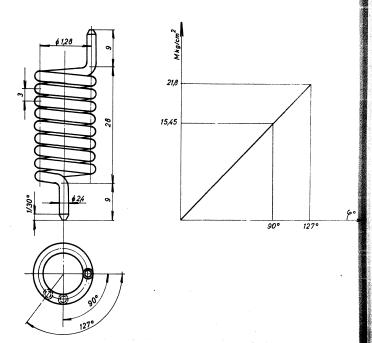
RECOCKING HANDLE DENT SPRING Material: Patent wire 160—180 kg/mm²
